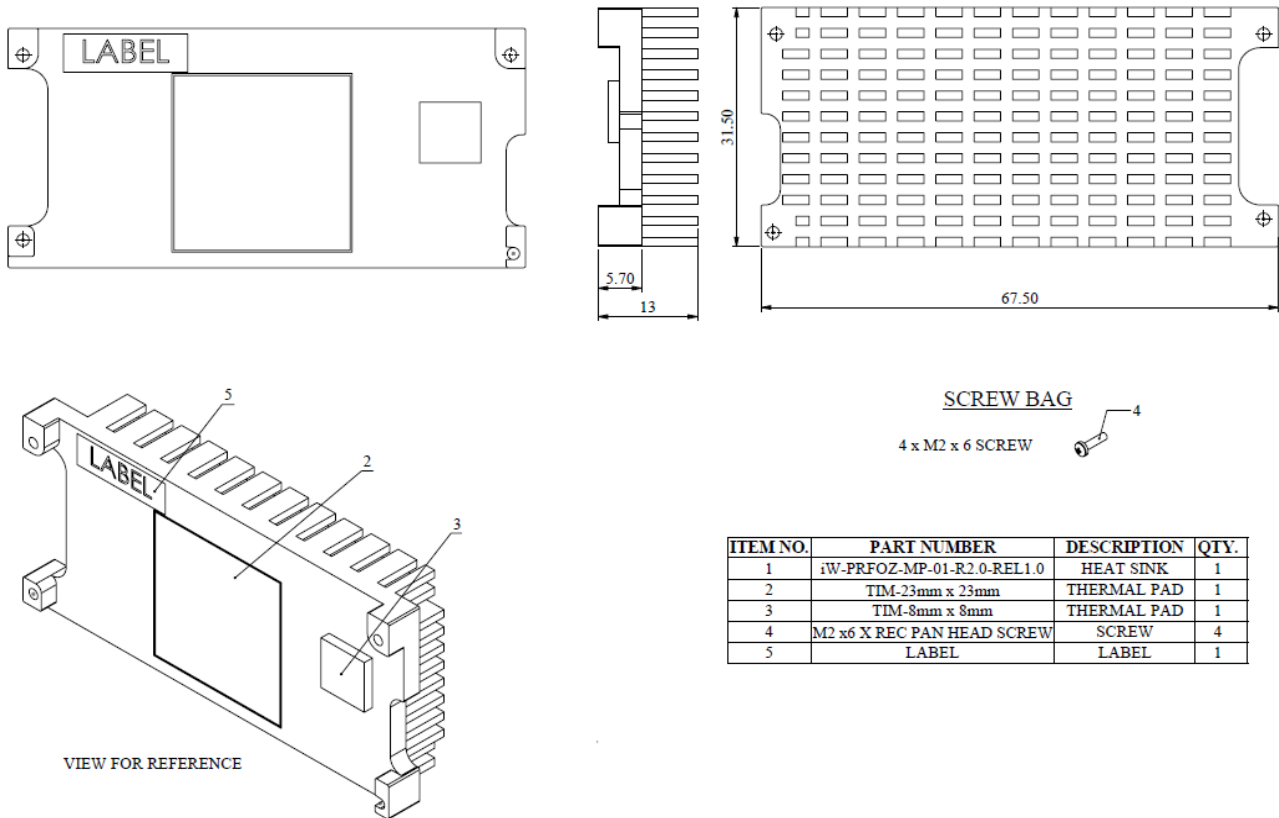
Zynq-7000 SoC SODIMM SOM Heat Sink
